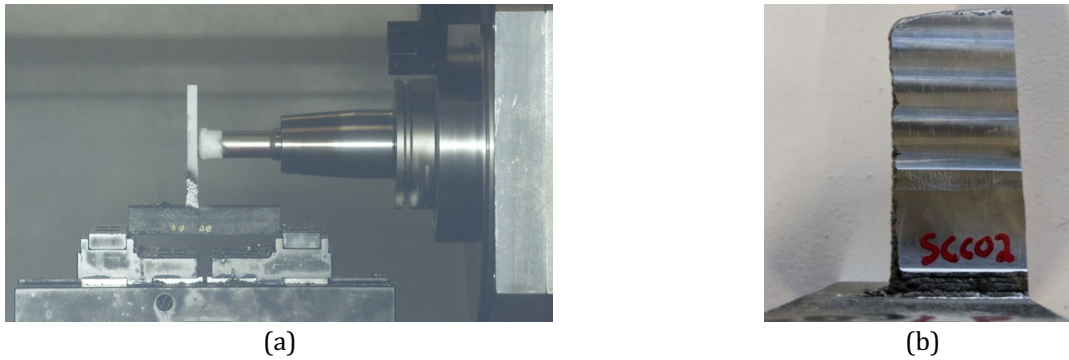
Implementation of machining strategy for laser-powder and wire DED samples including (a) tool holder and sample arrangement and (b) typical output.
